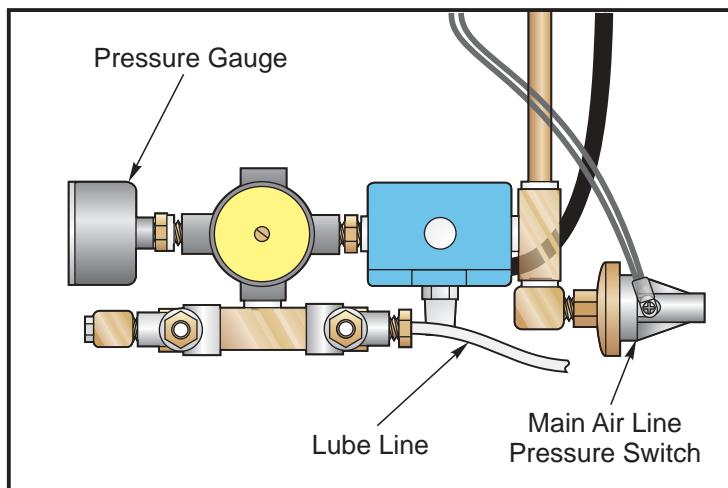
Top view of spindle lube/air solenoid assembly.
